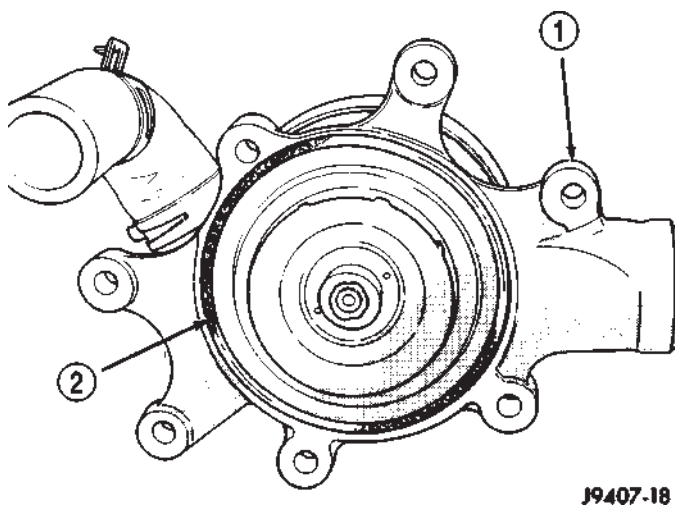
Water Pump O-Ring Seal—8.0L V-10
